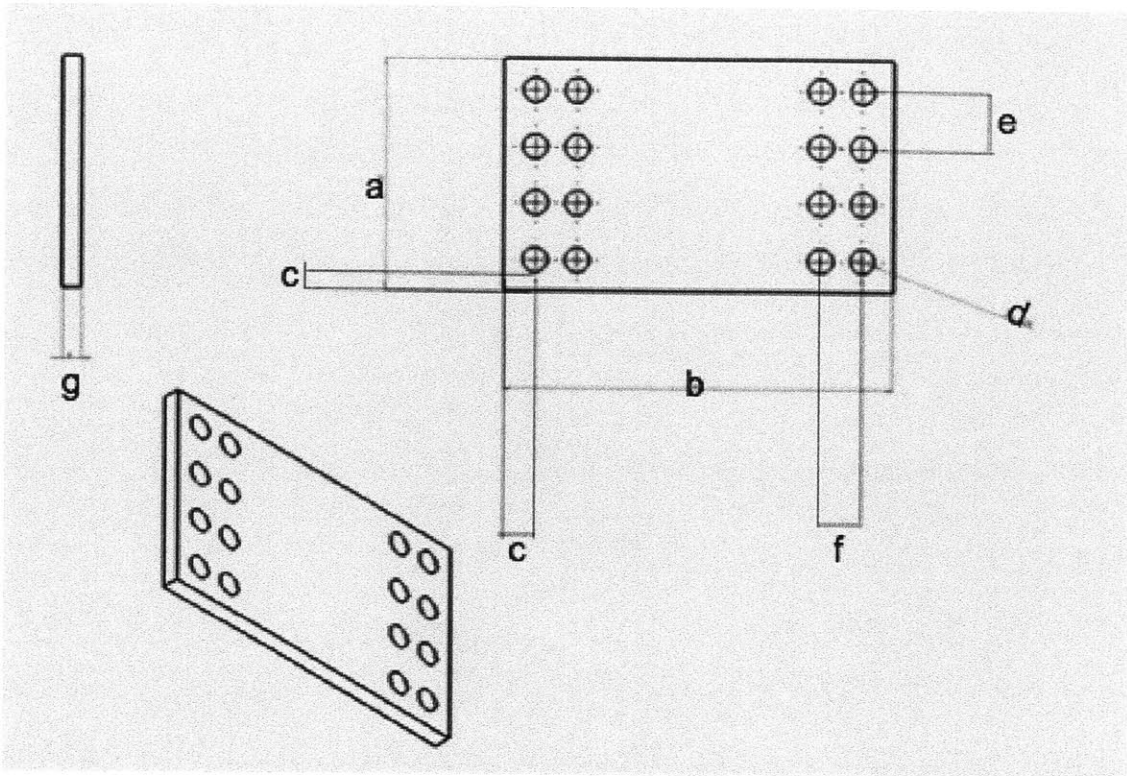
Compression Platen. Dimensions: (a) width of platen. (b) length of platen. (c) hole gap to edge. (d) hole radius. (e) hole-to-hole gap (f) platen thickness
